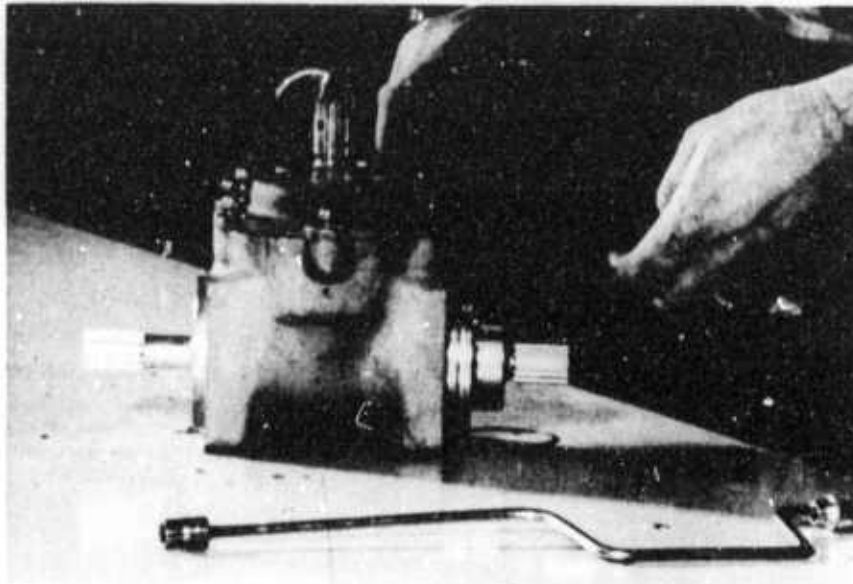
Gearbox manufactured by Western Gear Corporation for Lockheed C-130 aircraft.
